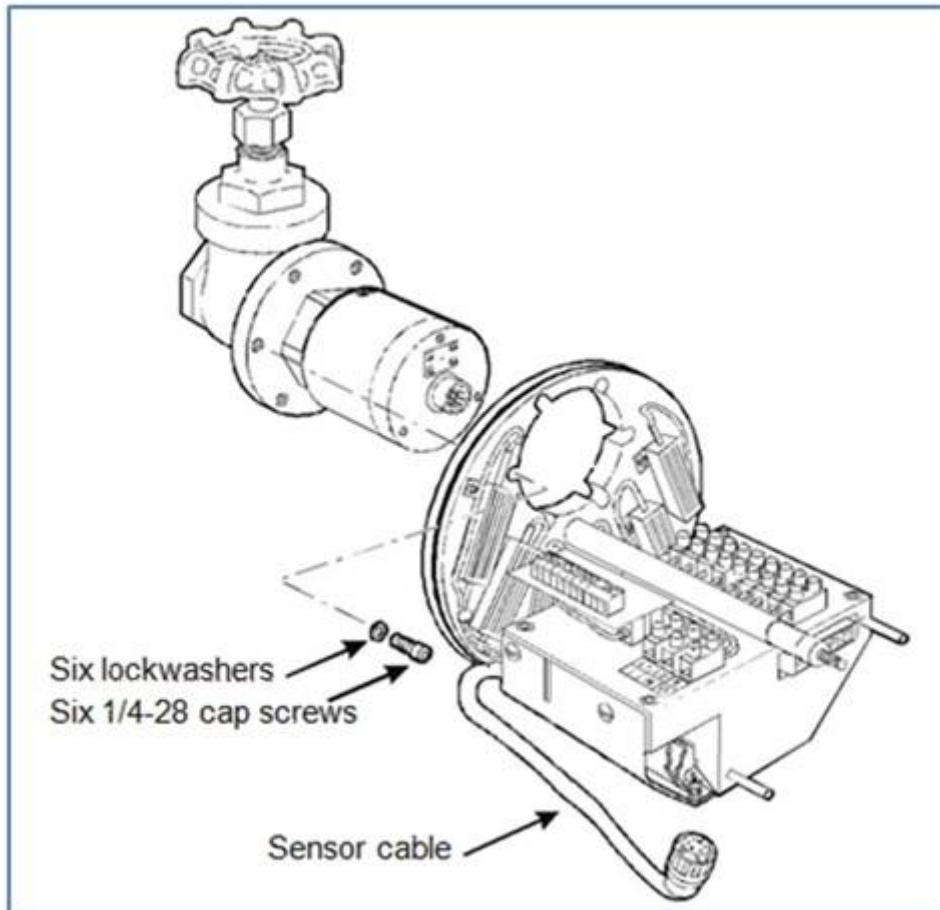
Fastening the Heating Plate to the Brass Adapter
